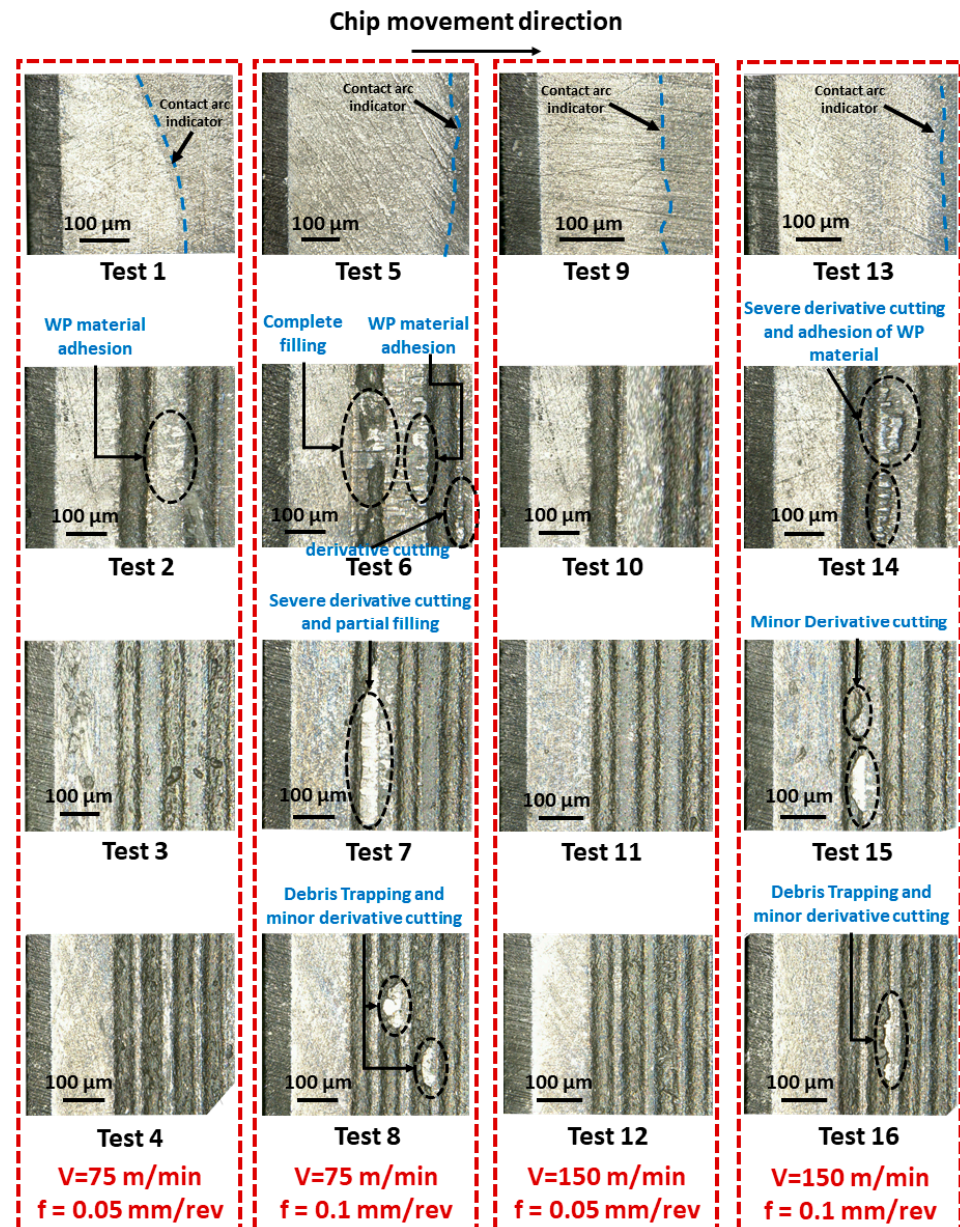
Two-dimensional microscopical images of the cutting tools rake faces of the used cutting inserts for 16 cutting tests.
